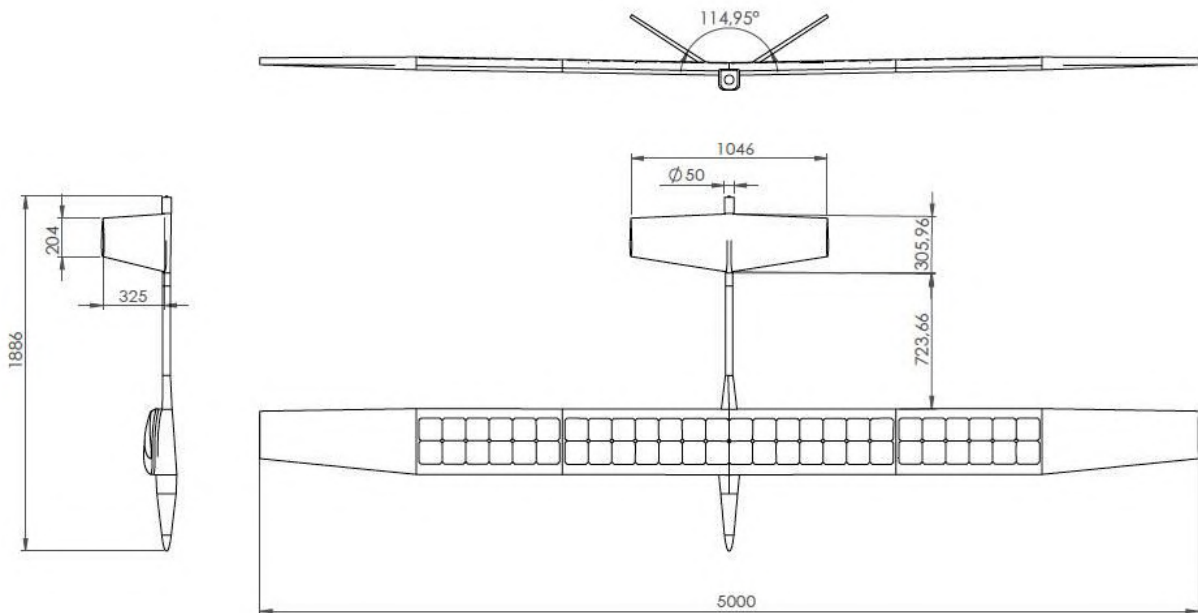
Three view drawing of the provisory LEEUAV (dimensions in mm).
